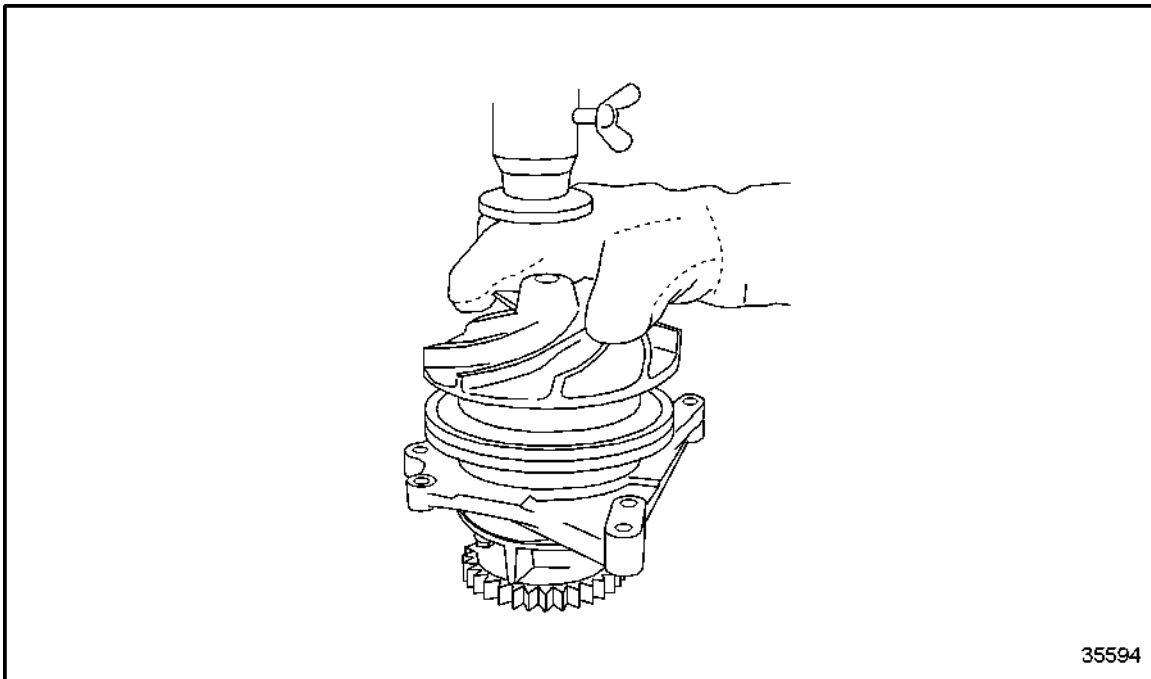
Placing Preheated Impeller on Pump Shaft
